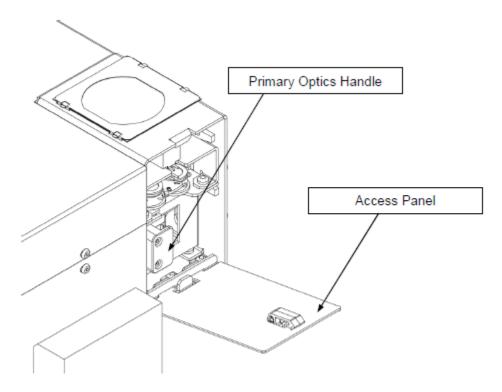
Open the Access Panel and Remove the Filter Wheel
